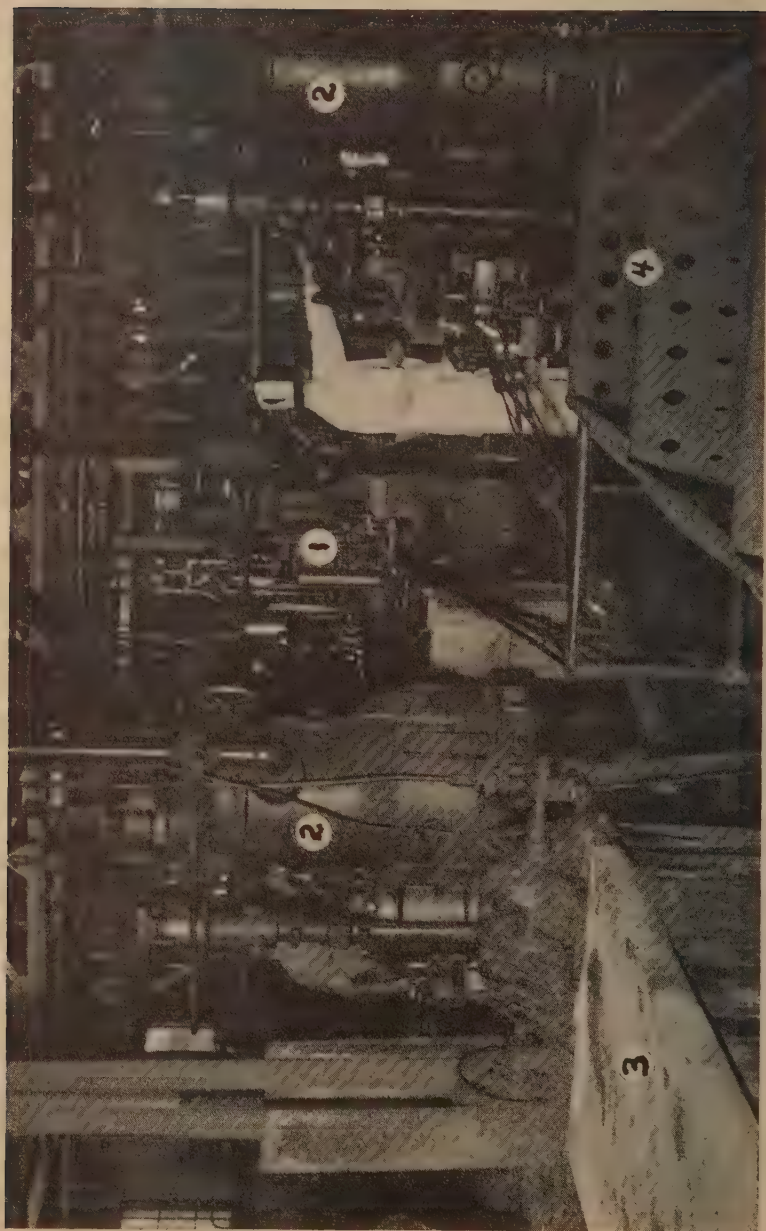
General view of vacuum closing machinery. The girl operator is placing lids in the capping machine. A stack of lids may be seen directly to the left of figure "1" which indicates a capping machine. The vacuum machines are marked "2". Tins may be seen emerging from the machine on the right. They are washed in the vat marked "3." Retort baskets marked "4," are seen in the lower right corner.
